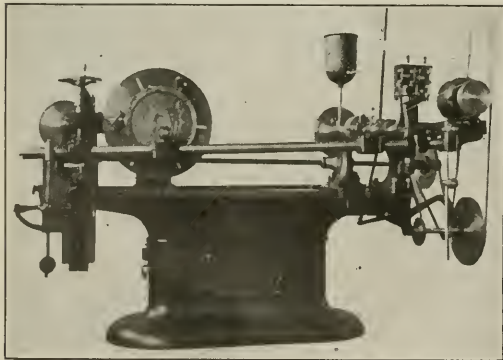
SMALL MOTOR-DRIVEN REDUCING MACHINE CUTTING DIE FOR A MEDAL
